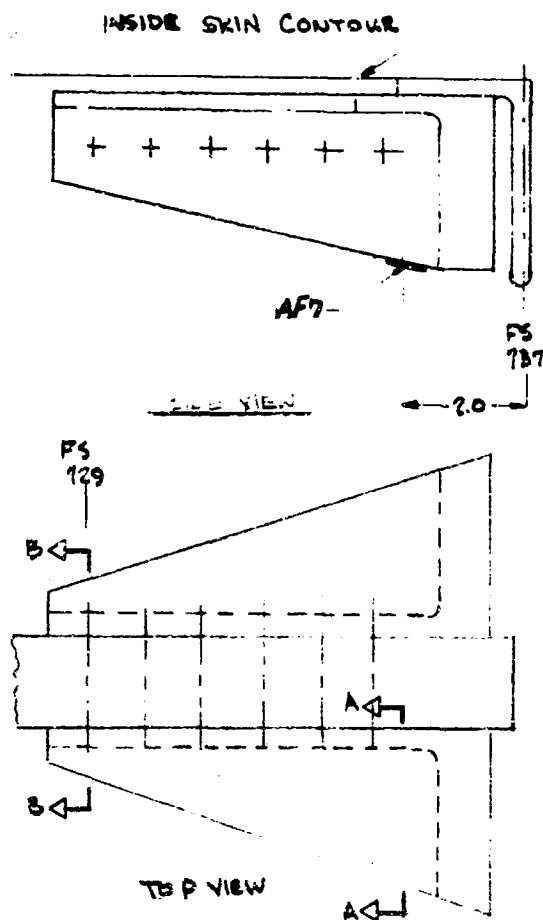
UPPER BLG1 LONGERON FITTING EXPLoded
